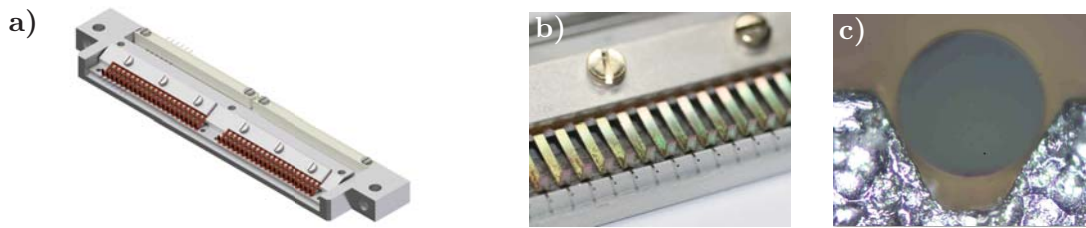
a) shows a CAD drawing of the fiber holder assembly. b) Photo of the fiber clamps pushing a fiber array into the grooves (after coating) and c) a close-up view of a single v-groove supporting an optical fiber substrate (taken from [149]).
